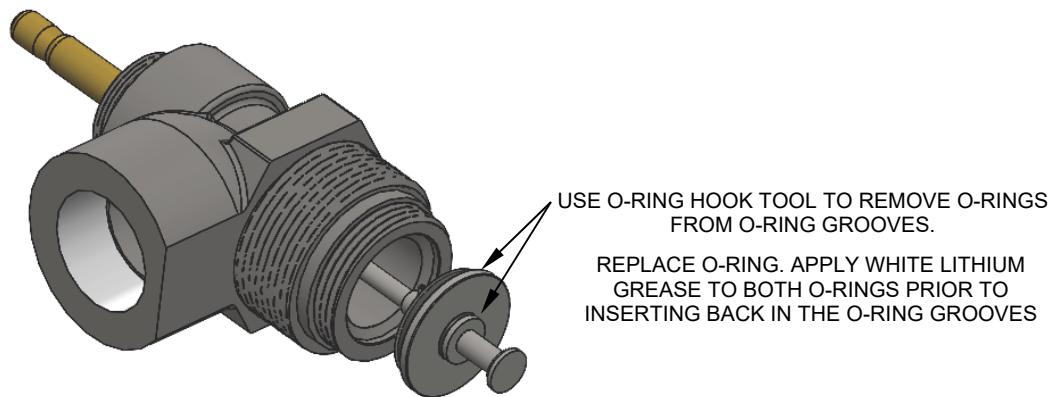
G – STEP 6 – Replace valve seat and valve stem base O-rings.
